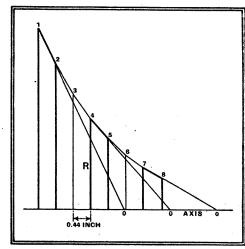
Dividing the diaphragm into sections, preparatory to marking out the rings.
